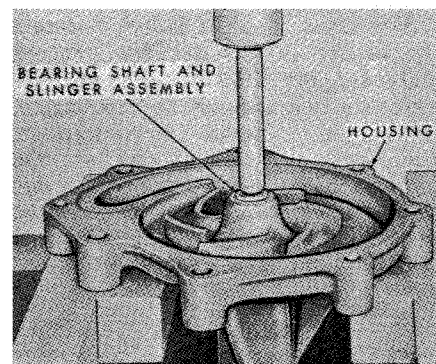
Press bearing, shaft and slinger assembly from rotor and pump housing.
